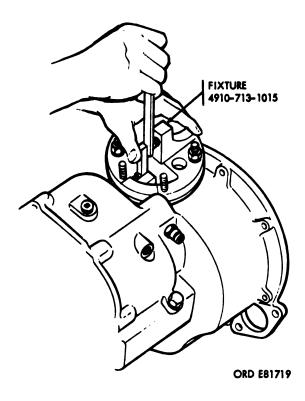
Checking depth of drive pinion using fixture—4910-713-1015.
